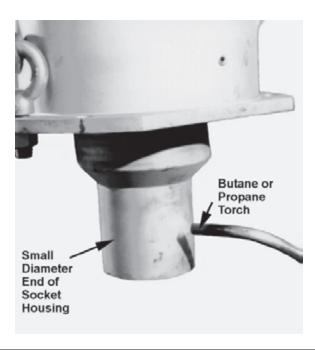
Heating Housing to Remove Roller Bearing from Small Diameter End
